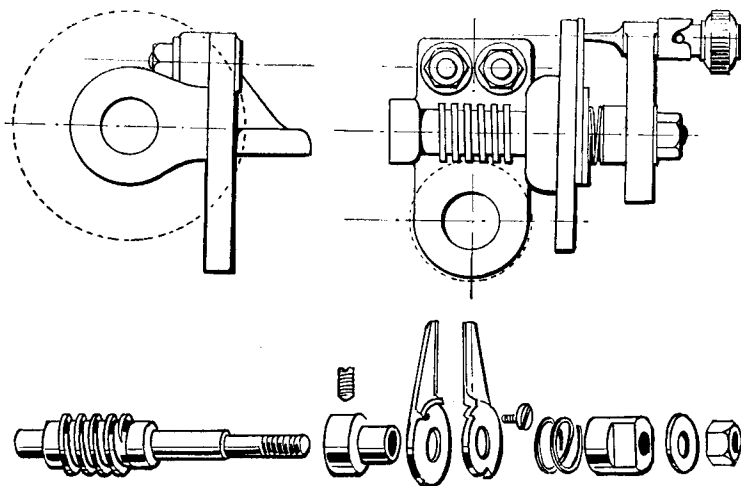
General layout of dividing attachment with exploded view of worm assembly, less division plate and arm
